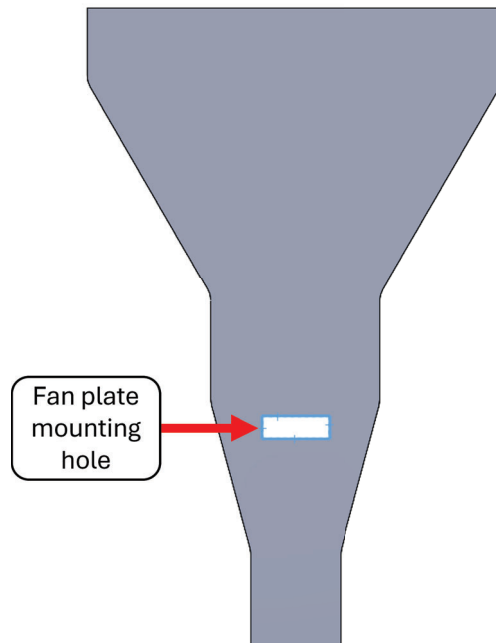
The diffuser side panels have a cutout which accommodates an insert that holds the diffuser fan plate.
